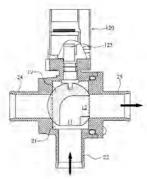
Switching ball valve Photo-118: Switching ball valve
